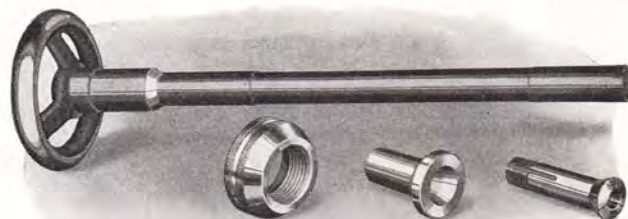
Hand Wheel Draw-in Collet Chuck Attachment.
